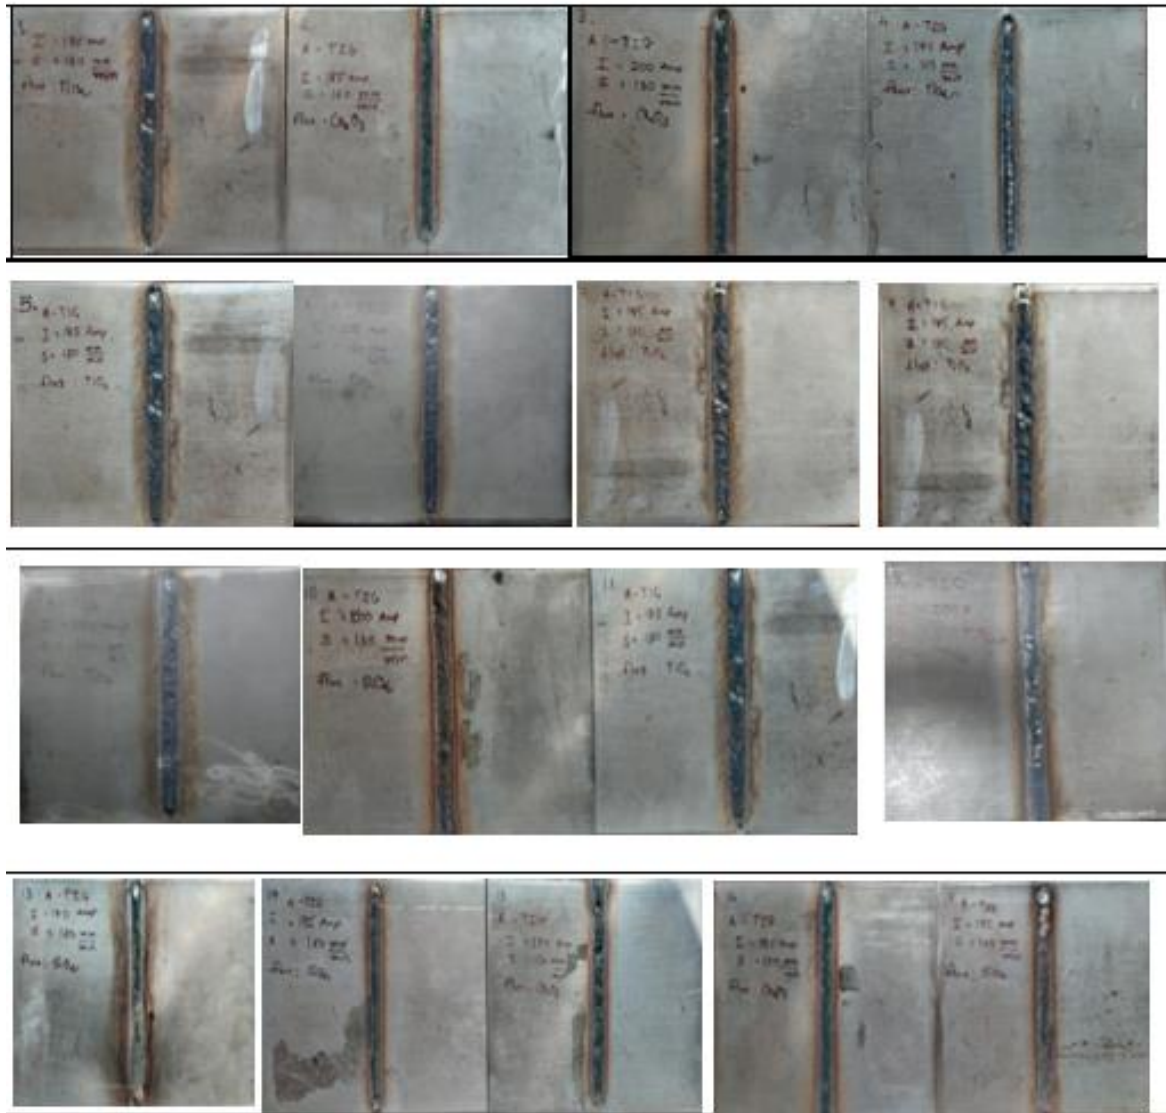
A-TIG welded specimen as per design matrix
